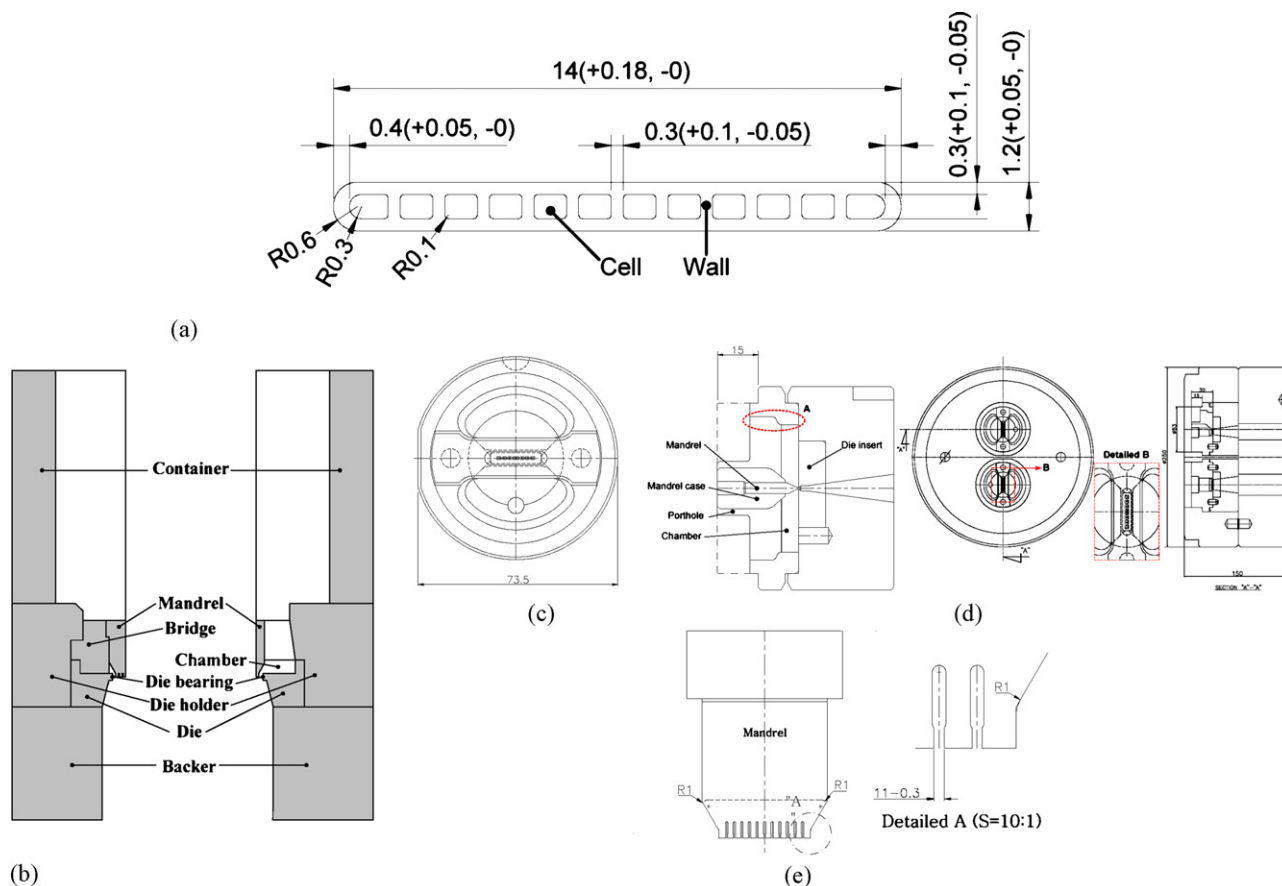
Condenser tube shape and constructions of porthole die. (a) Shape of required dimension and specific composition of condenser tube, (b) Schematic of porthole die, (c) Bridge and die, (d) Backer and LIP and (e) Mandrel.
